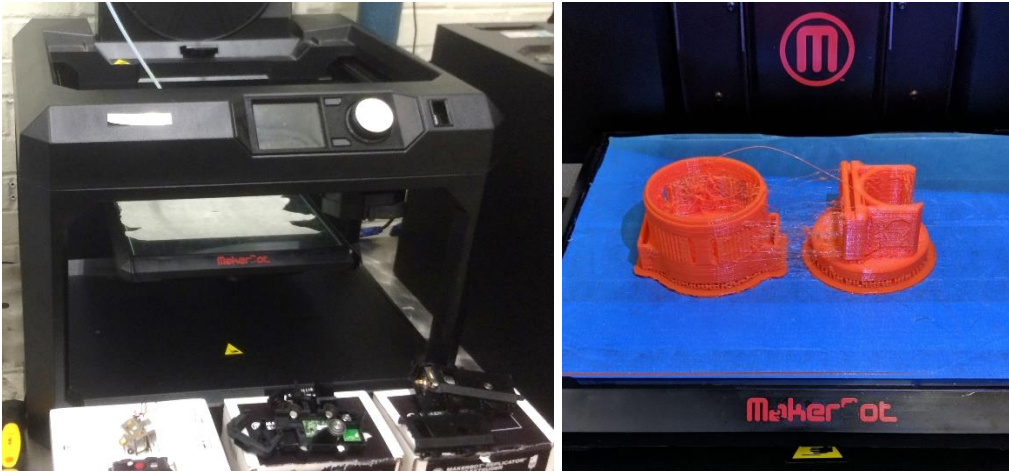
Photograph showing (a) Makerbot 3-D printer and, (b) 3-D printed harvester enclosure
